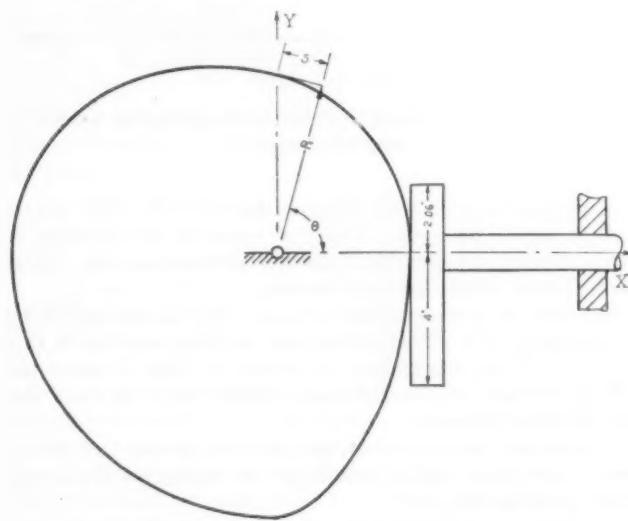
CAM AND FOLLOWER FOR EXAMPLE 3
